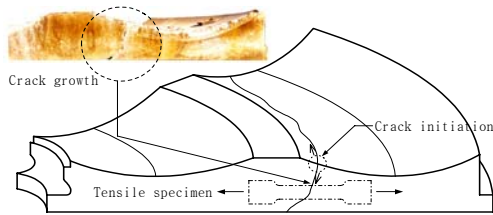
Sampling direction of tensile and bending specimen and fracture process of roller mill
